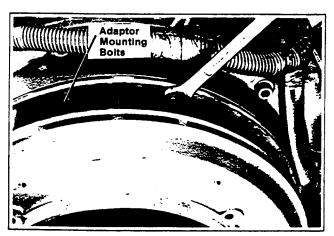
15RMY, 15RMOY & 17.5ROY Adaptor Removal
